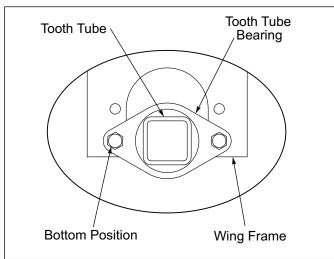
Wing Tooth Tube Bearing Position for 24" Notched Wheels
